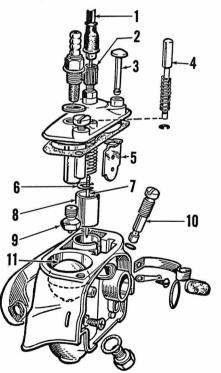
Exploded view of Villiers SM.10 carburetor used on 3K engines.
